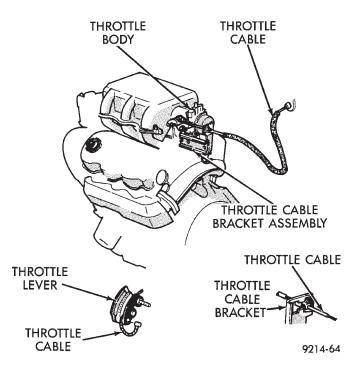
Throttle Cable Attachment to Throttle Body Attachment— 3.0L Engine
